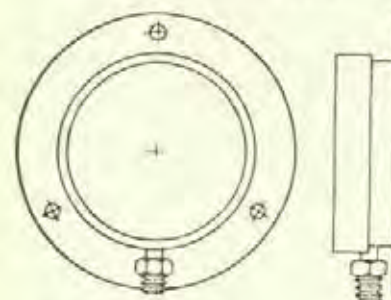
SURFACE MOUNTING GAUGE WITH BOTTOM CONNECTION
